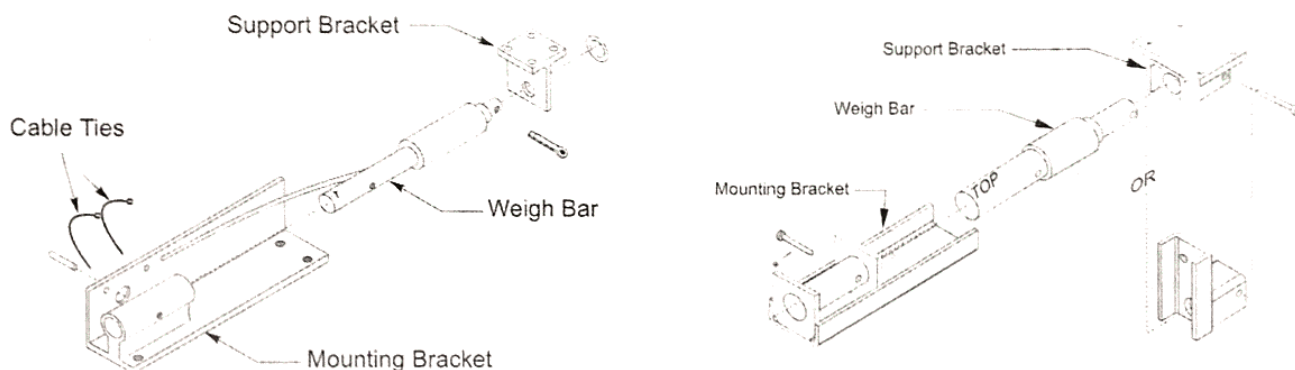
shows an exploded view of single-ended Weigh Bars, mounting brackets, types of support brackets that can be used, and associated hardware. One end of the Weigh Bar is held stationary in the mounting bracket. The mounting bracket is bolted to a base-plate embedded in a concrete support pier (for platform scales) or to the equipment frame (for equipment mounted scales). Support brackets are fastened onto the scale platform or equipment box, etc. and fit over the other end of the bar. The support brackets are allowed to slide a small distance on the Weigh Bar so they will not bind as the Weigh Bars flex.
